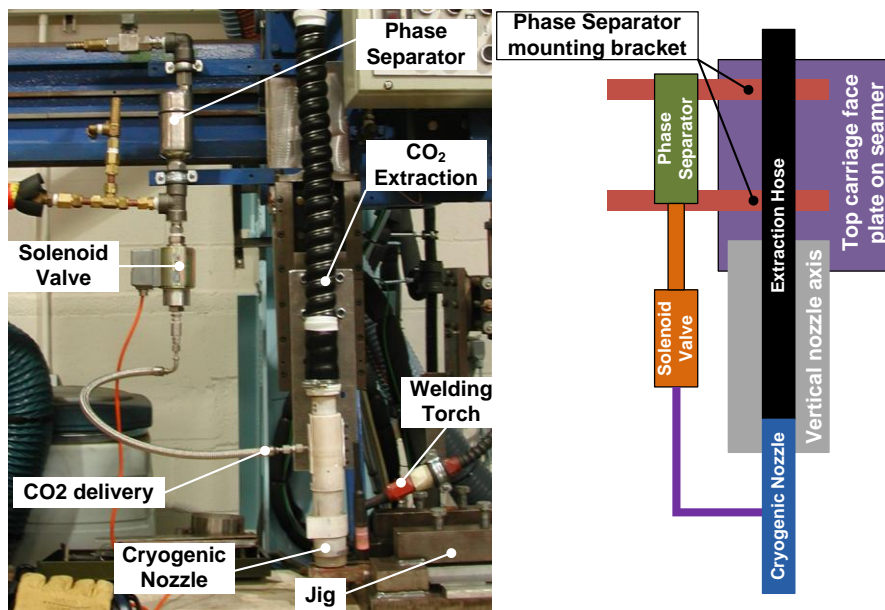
Picture and schematics of TTC Setup4 with changed nozzle and phase separator mounting arrangement to reduce nozzle lifting
